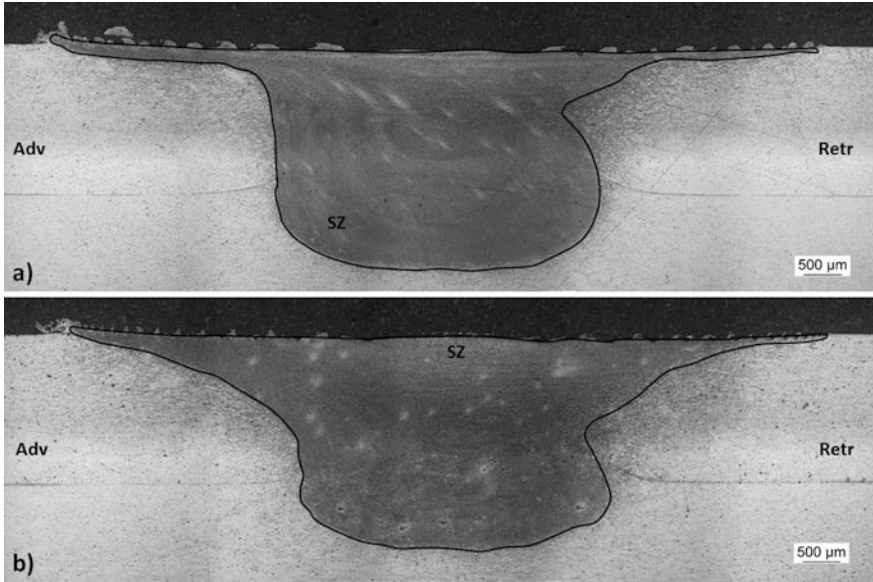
Cross-sections of FSW laps joints produced at 800 rpm and 254 mm/min (0.32 mm/rev) with a conventional threaded tool and b tool with 3 flats
